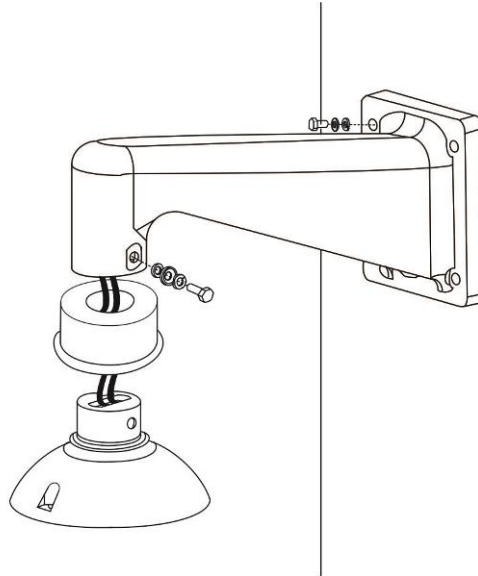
Wall Mount: Standard Wall Mount + Mount Kit
